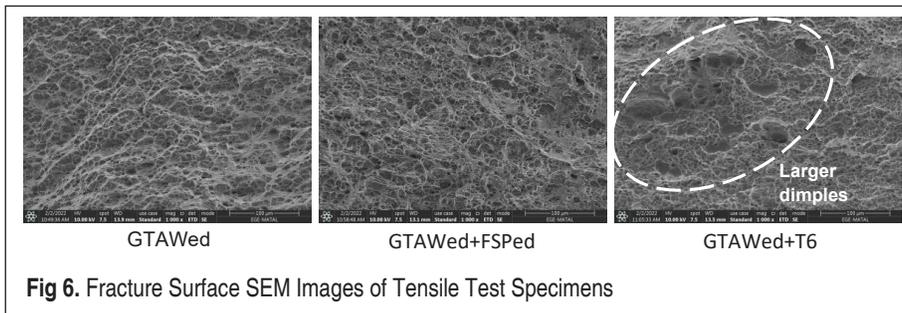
Fracture Surface SEM Images of Tensile Test Specimens
